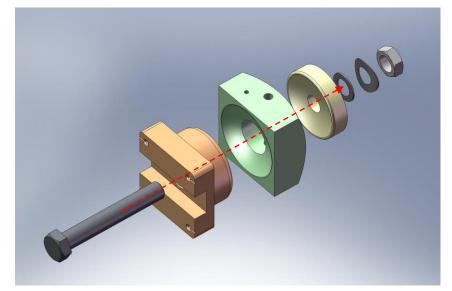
Exploded view of sensor spherical mount. This is a sub-assembly of the Position Sensor Assembly (D071464).
